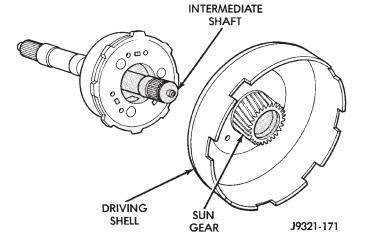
Sun Gear And Driving Shell Assembly Removal—46RH
